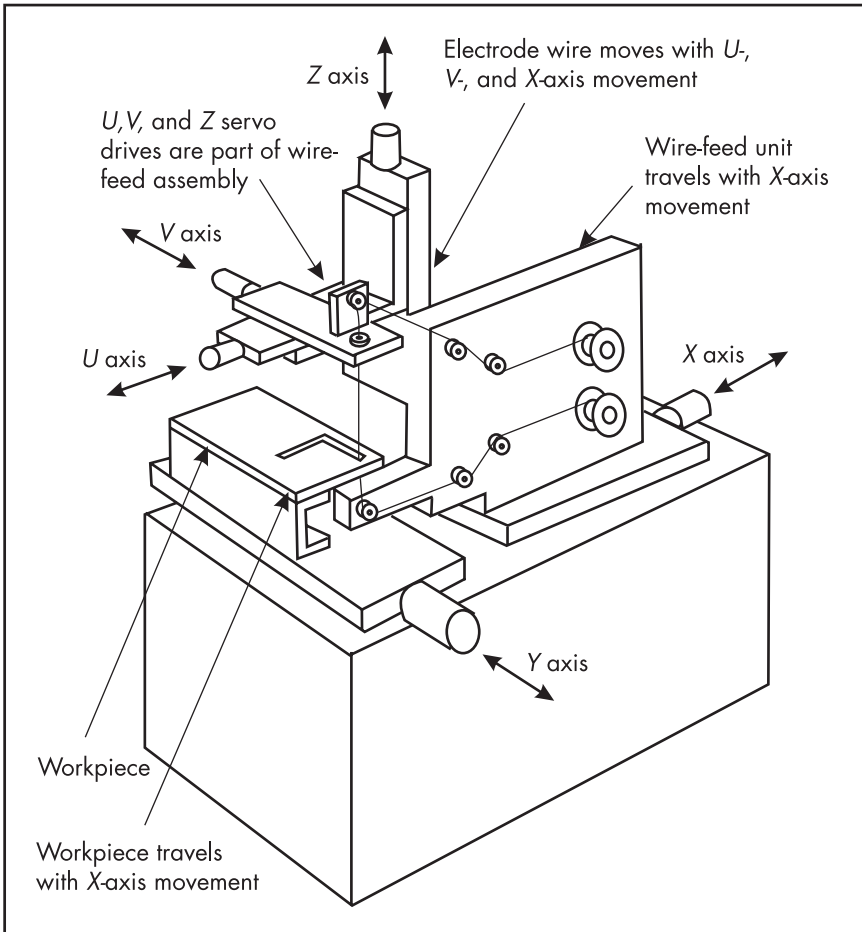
Moving-workpiece-and-electrode wire-cut design.
